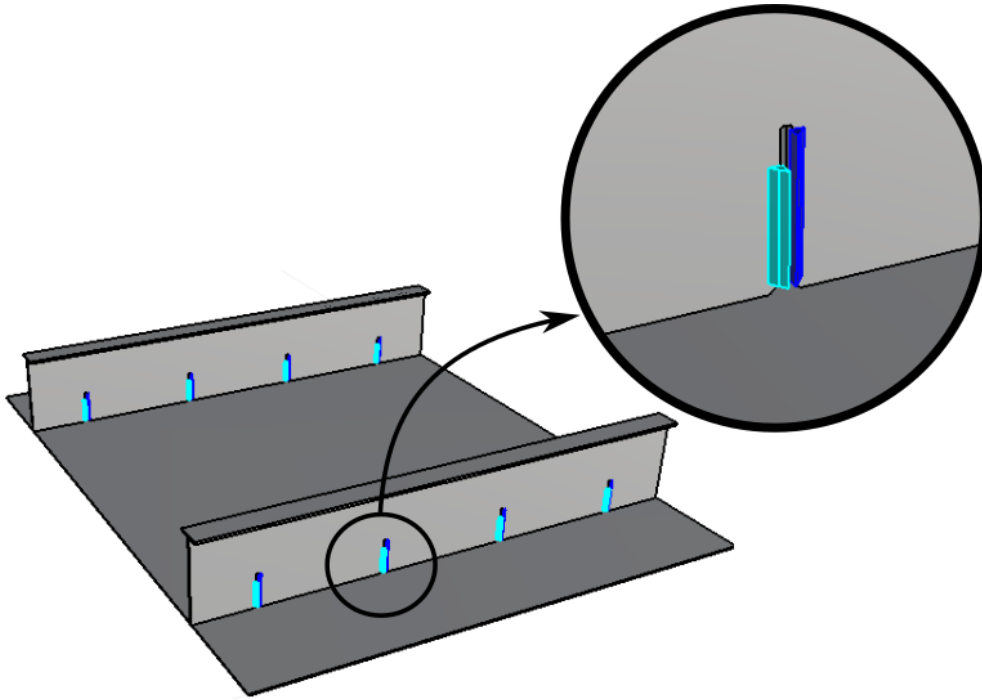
Weld beads of J1 to J8 welding lines
